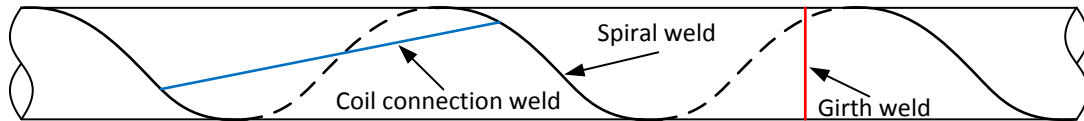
Schematic representation of a spiral-welded tube with a spiral weld, girth weld and coil connection weld.
